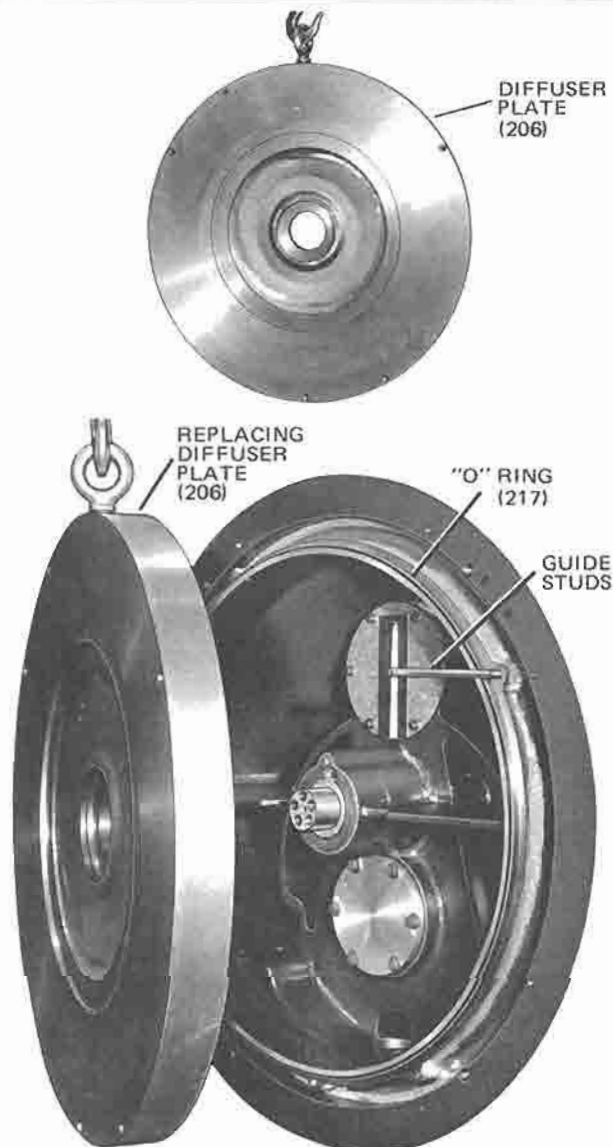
REMOVING AND REPLACING DIFFUSER PLATE
